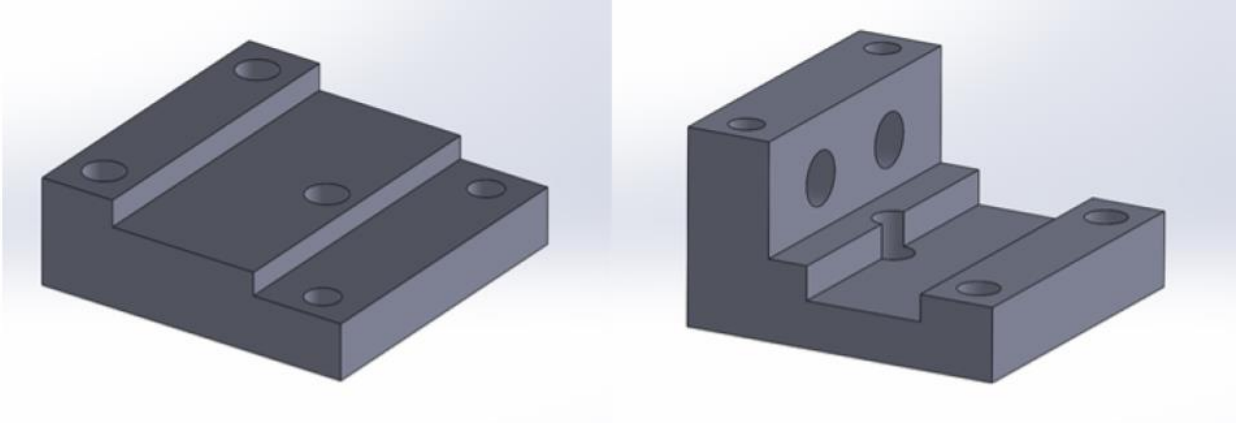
2<sup>nd</sup> grip design: Left: Part 2, Right: Part 3
